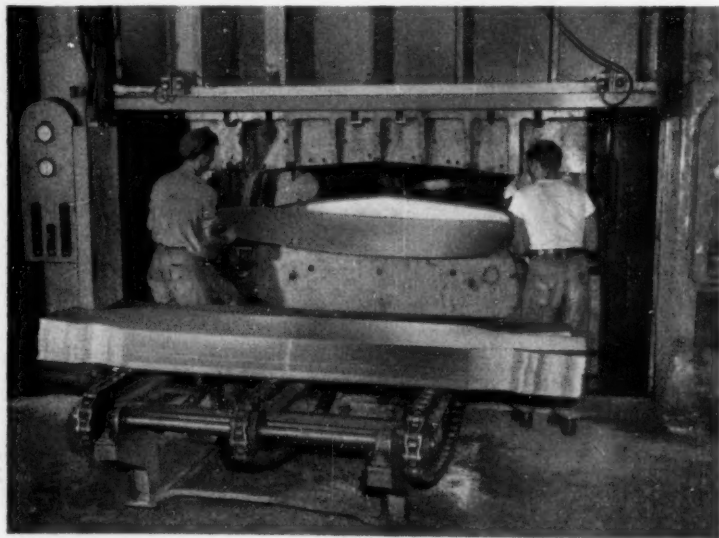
The 700-ton Lake Erie Press Employed for Drawing Bumpers
